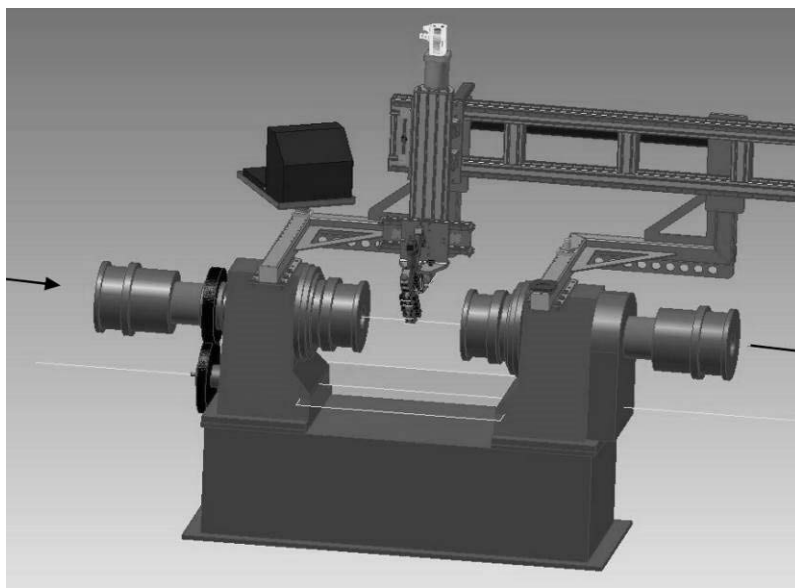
Visage of the machine for automated TIG - TIG process, tube rotates during welding
